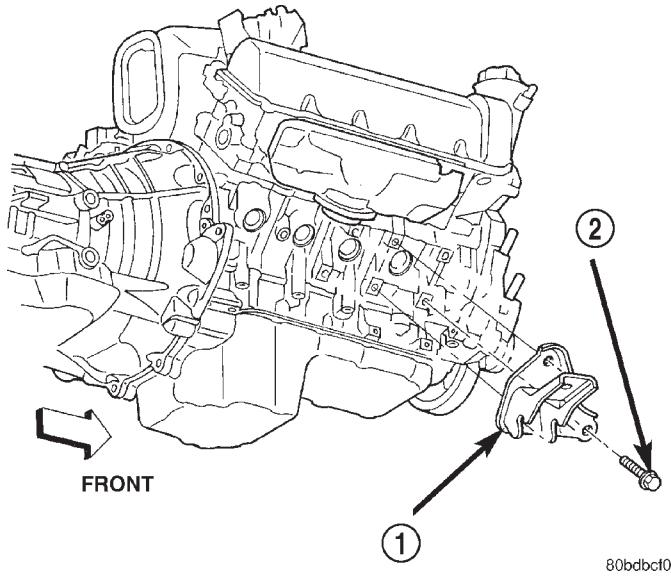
Engine Insulator Mount 4x4 Vehicle—Right Side
